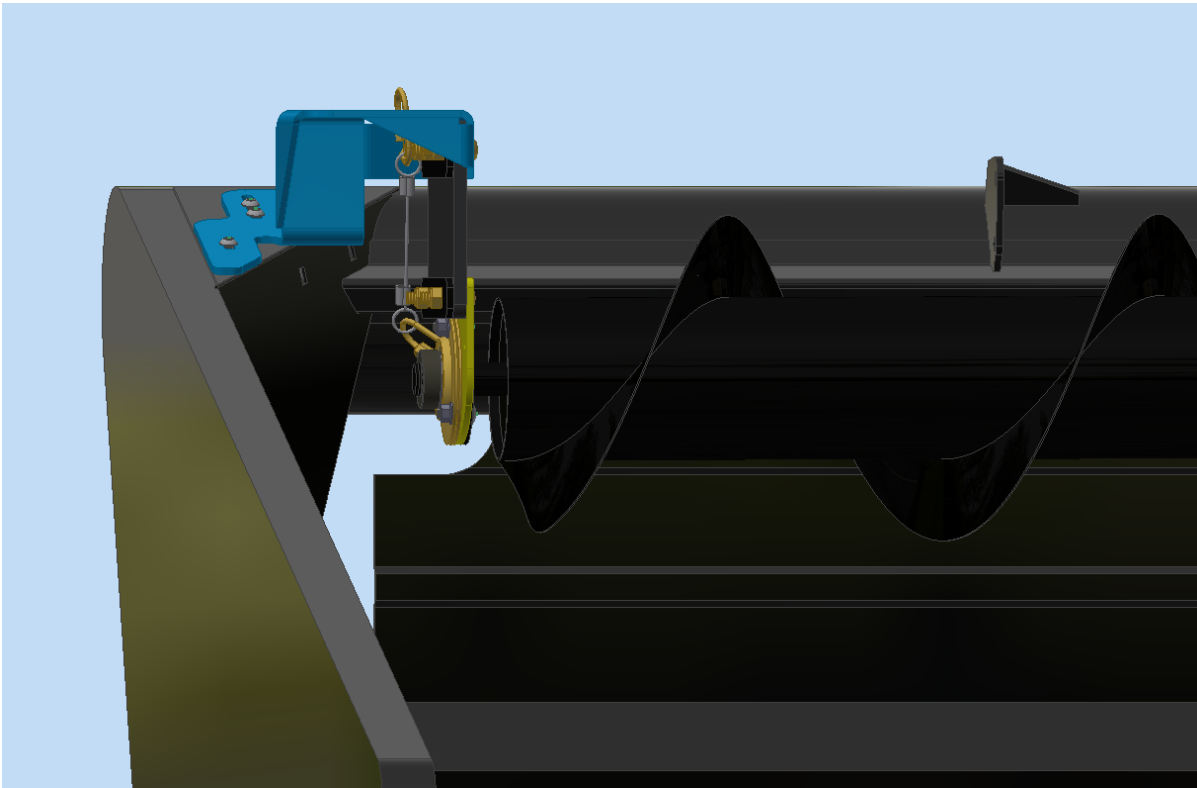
RH END FRONT VIEW MACDON FD KIT
